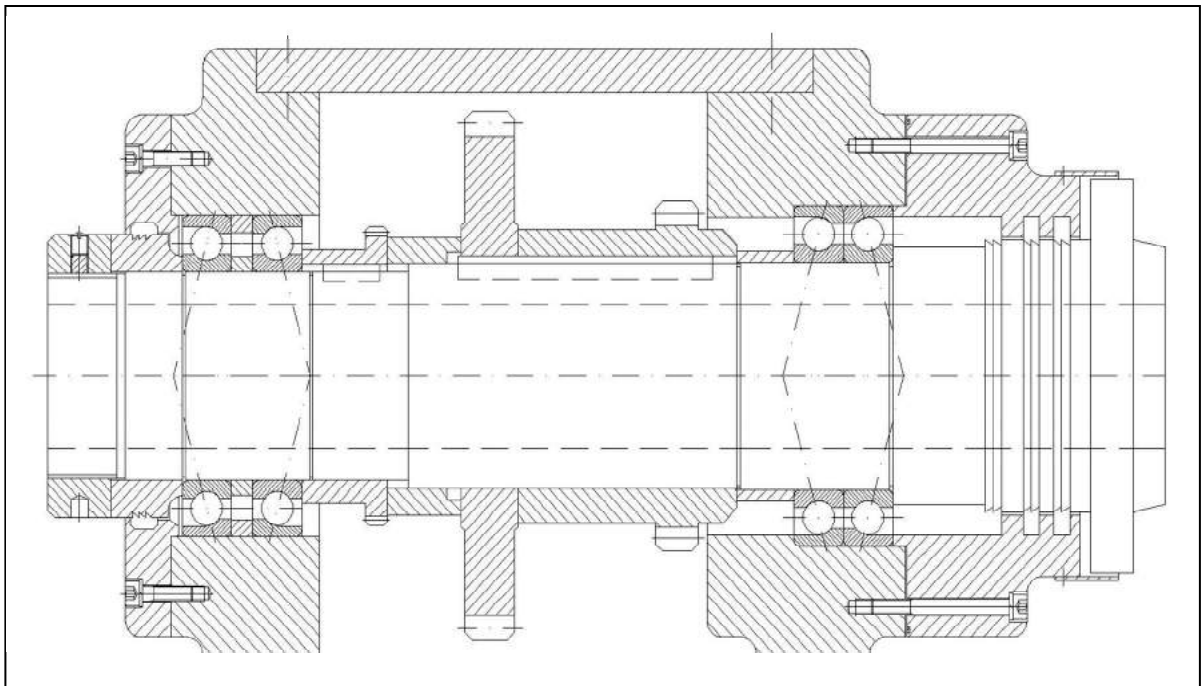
The Headstock of the precision boring machine DB24 fy Eislinger, [6]
